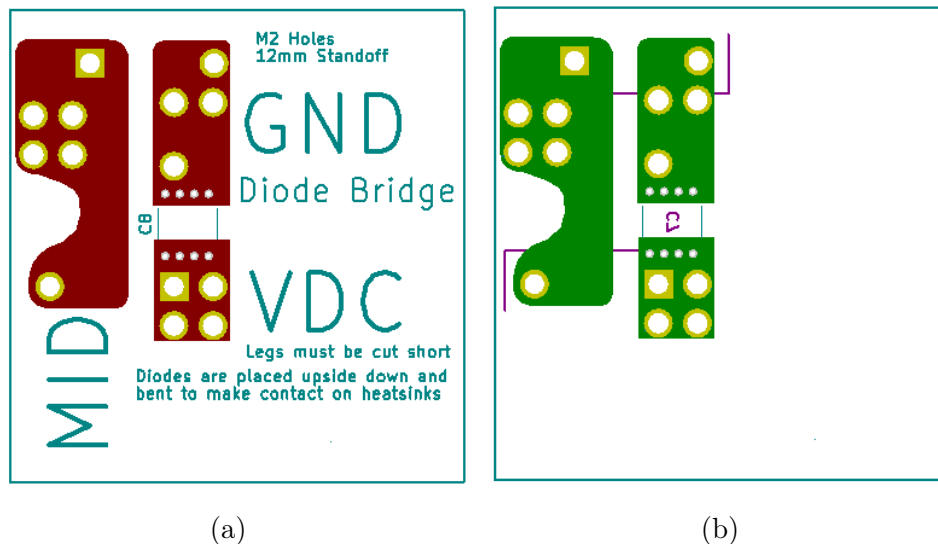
(a) Top view and (b) bottom view of the diode-bridge module PCB.
